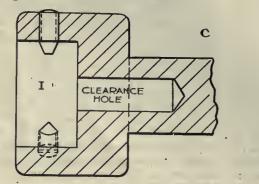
DETAIL VIEW OF SCREWING ENDS.
